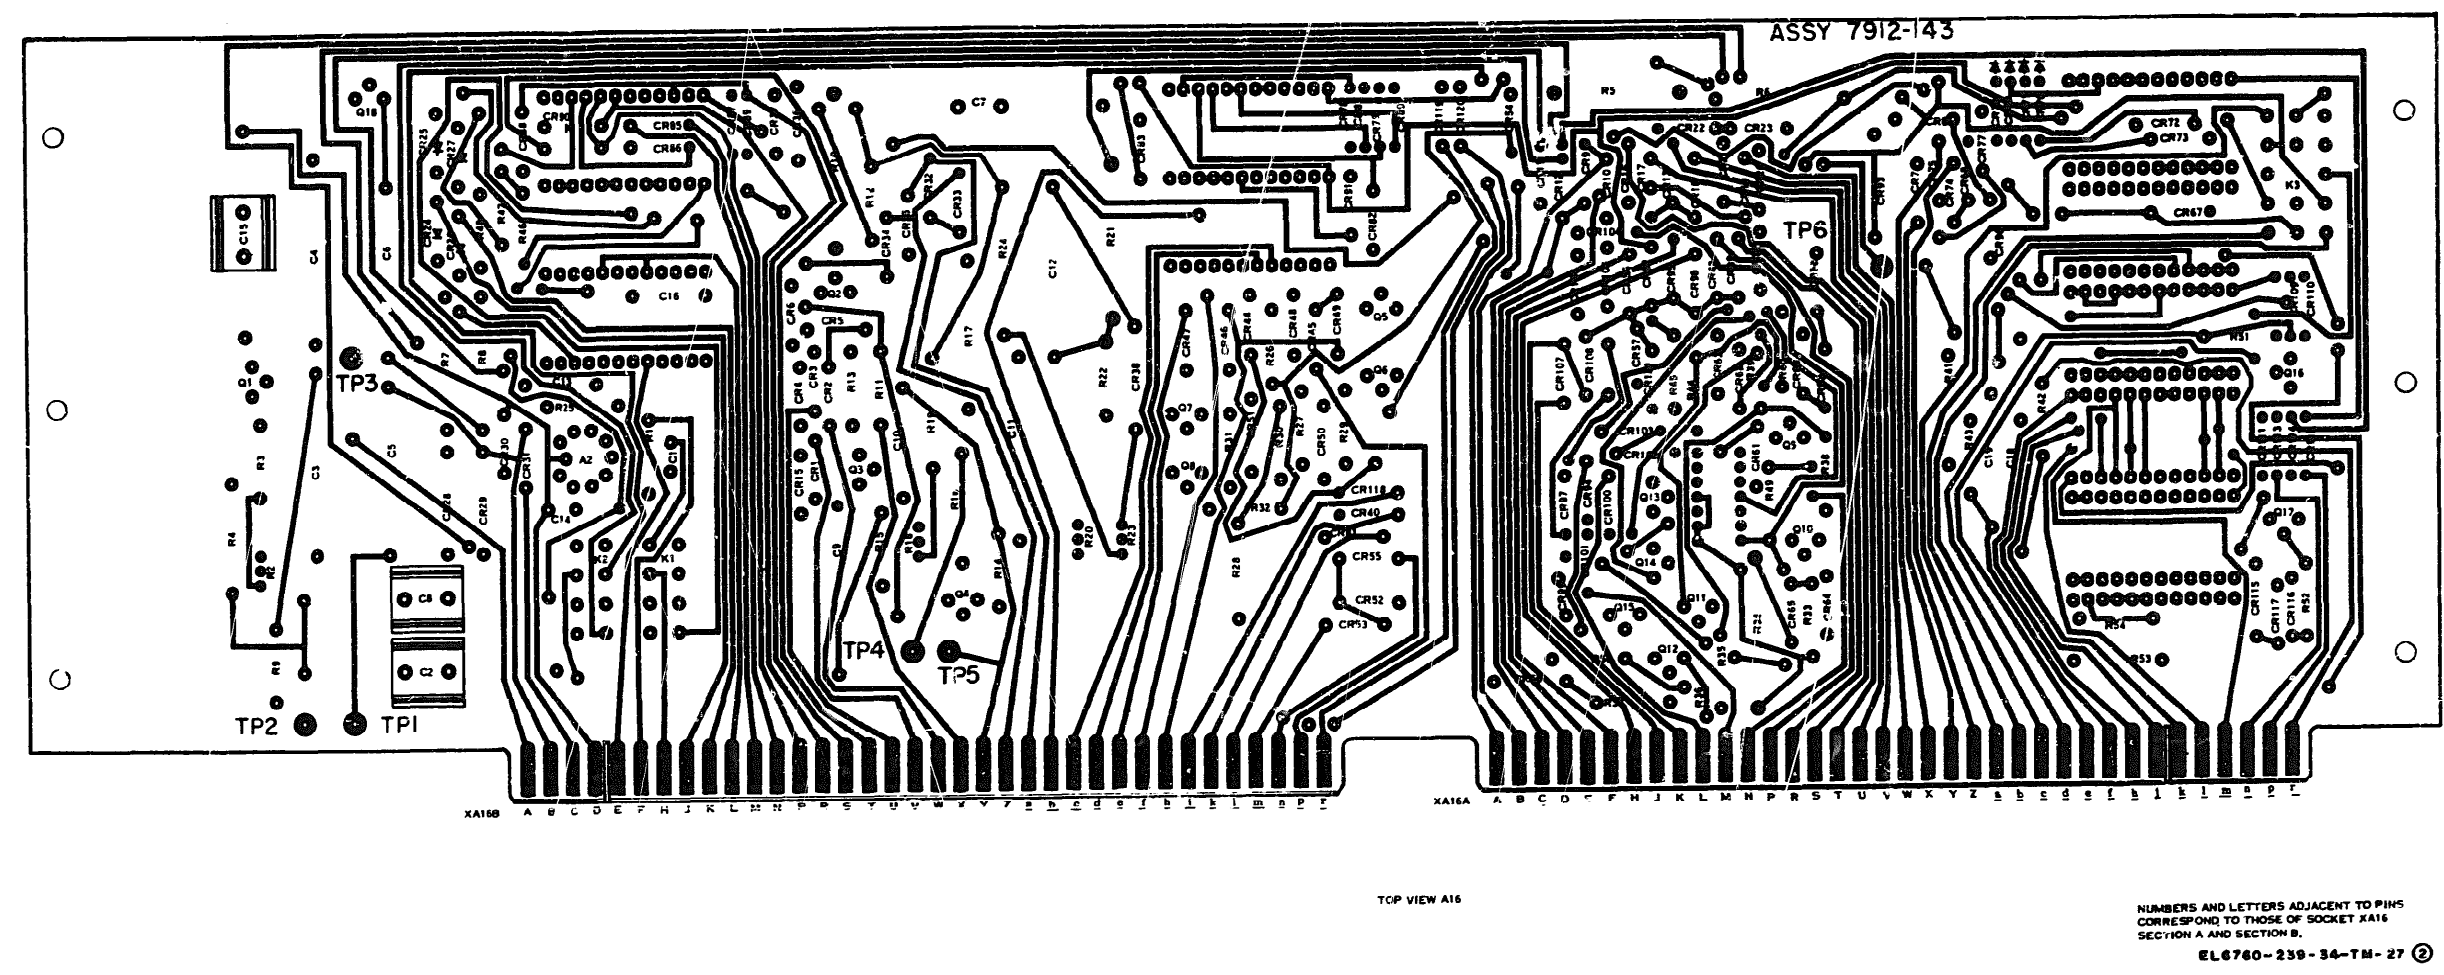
(2). Printed circuit board and component assembly, wiring diagram (sheet 2 of 4).
